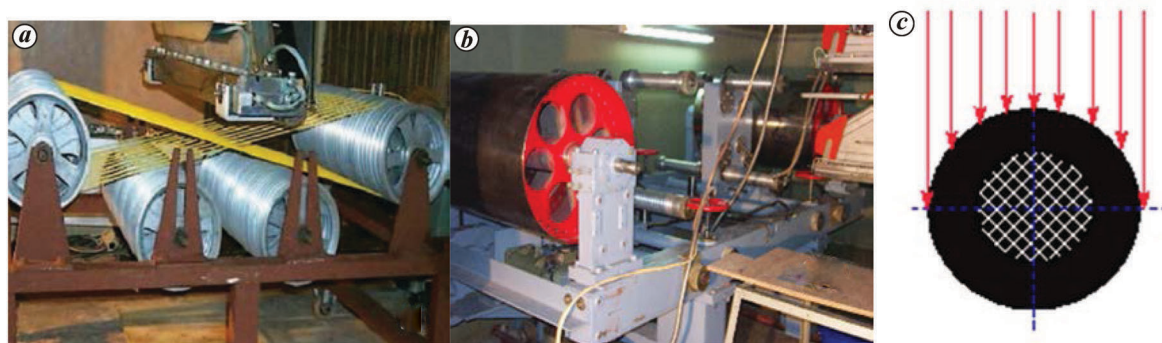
EB crosslinking of cables. *a*, Continuous eight-shaped conveyor for both sides irradiation. *b*, Drum conveyor. *c*, View of one side cable irradiation.
